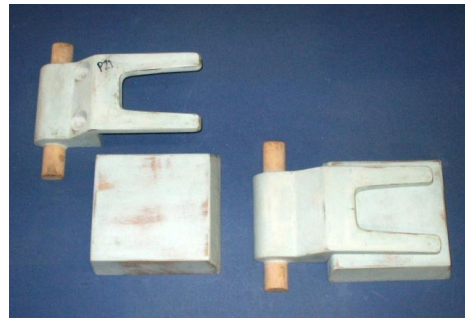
Rudder gudgeon patterns with follower boards and stock round core prints. Upper left is the follower board moved to show the change in parting plane. Note the draft and radius edges on both pattern and follower boards.
